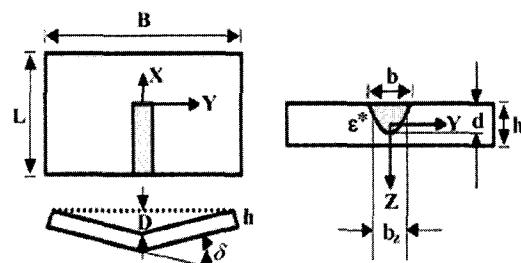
Heat transfer model of bead-on-plate welding
